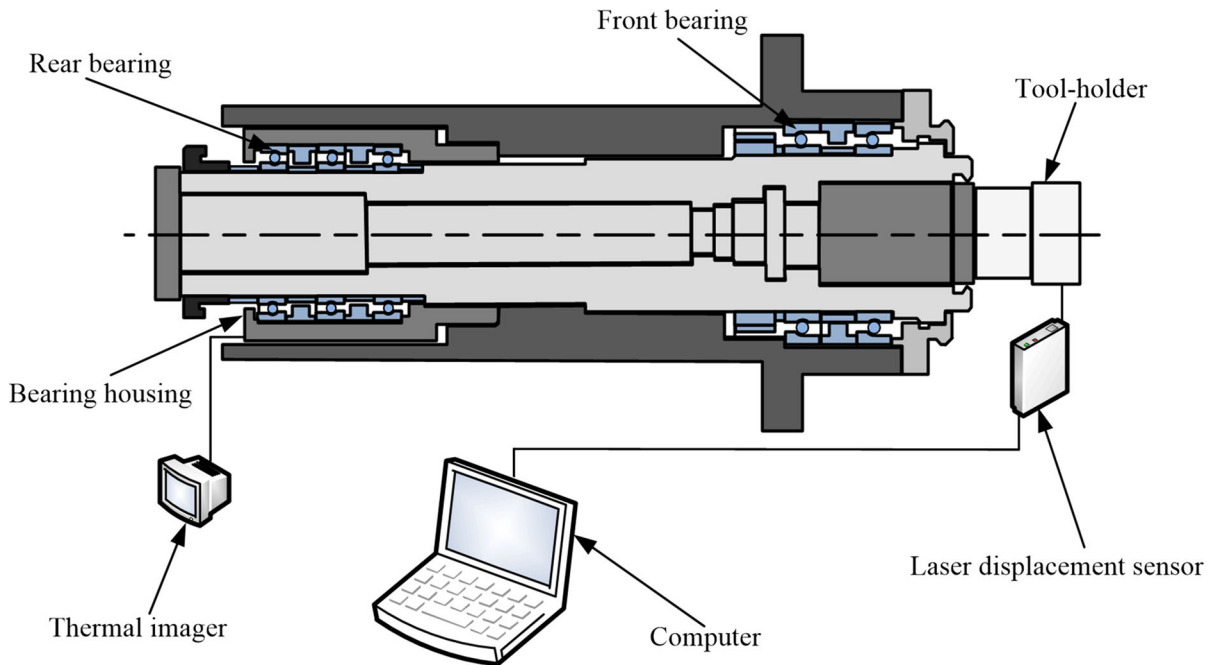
Schematic diagram of CNC lathe spindle-bearing system experiment rig
